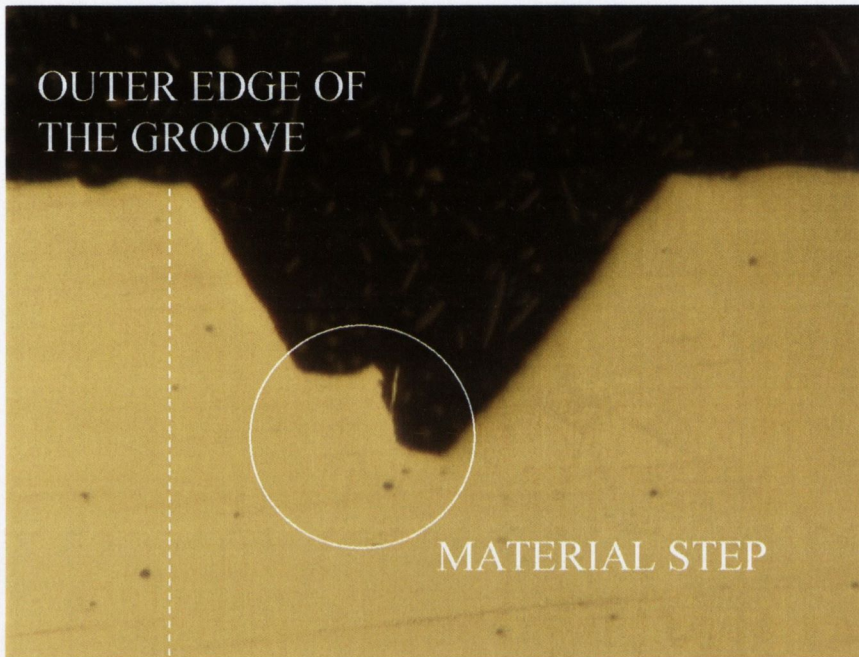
Image of cross-section of the workpiece taken after approximately 360° rotation. (x100)
